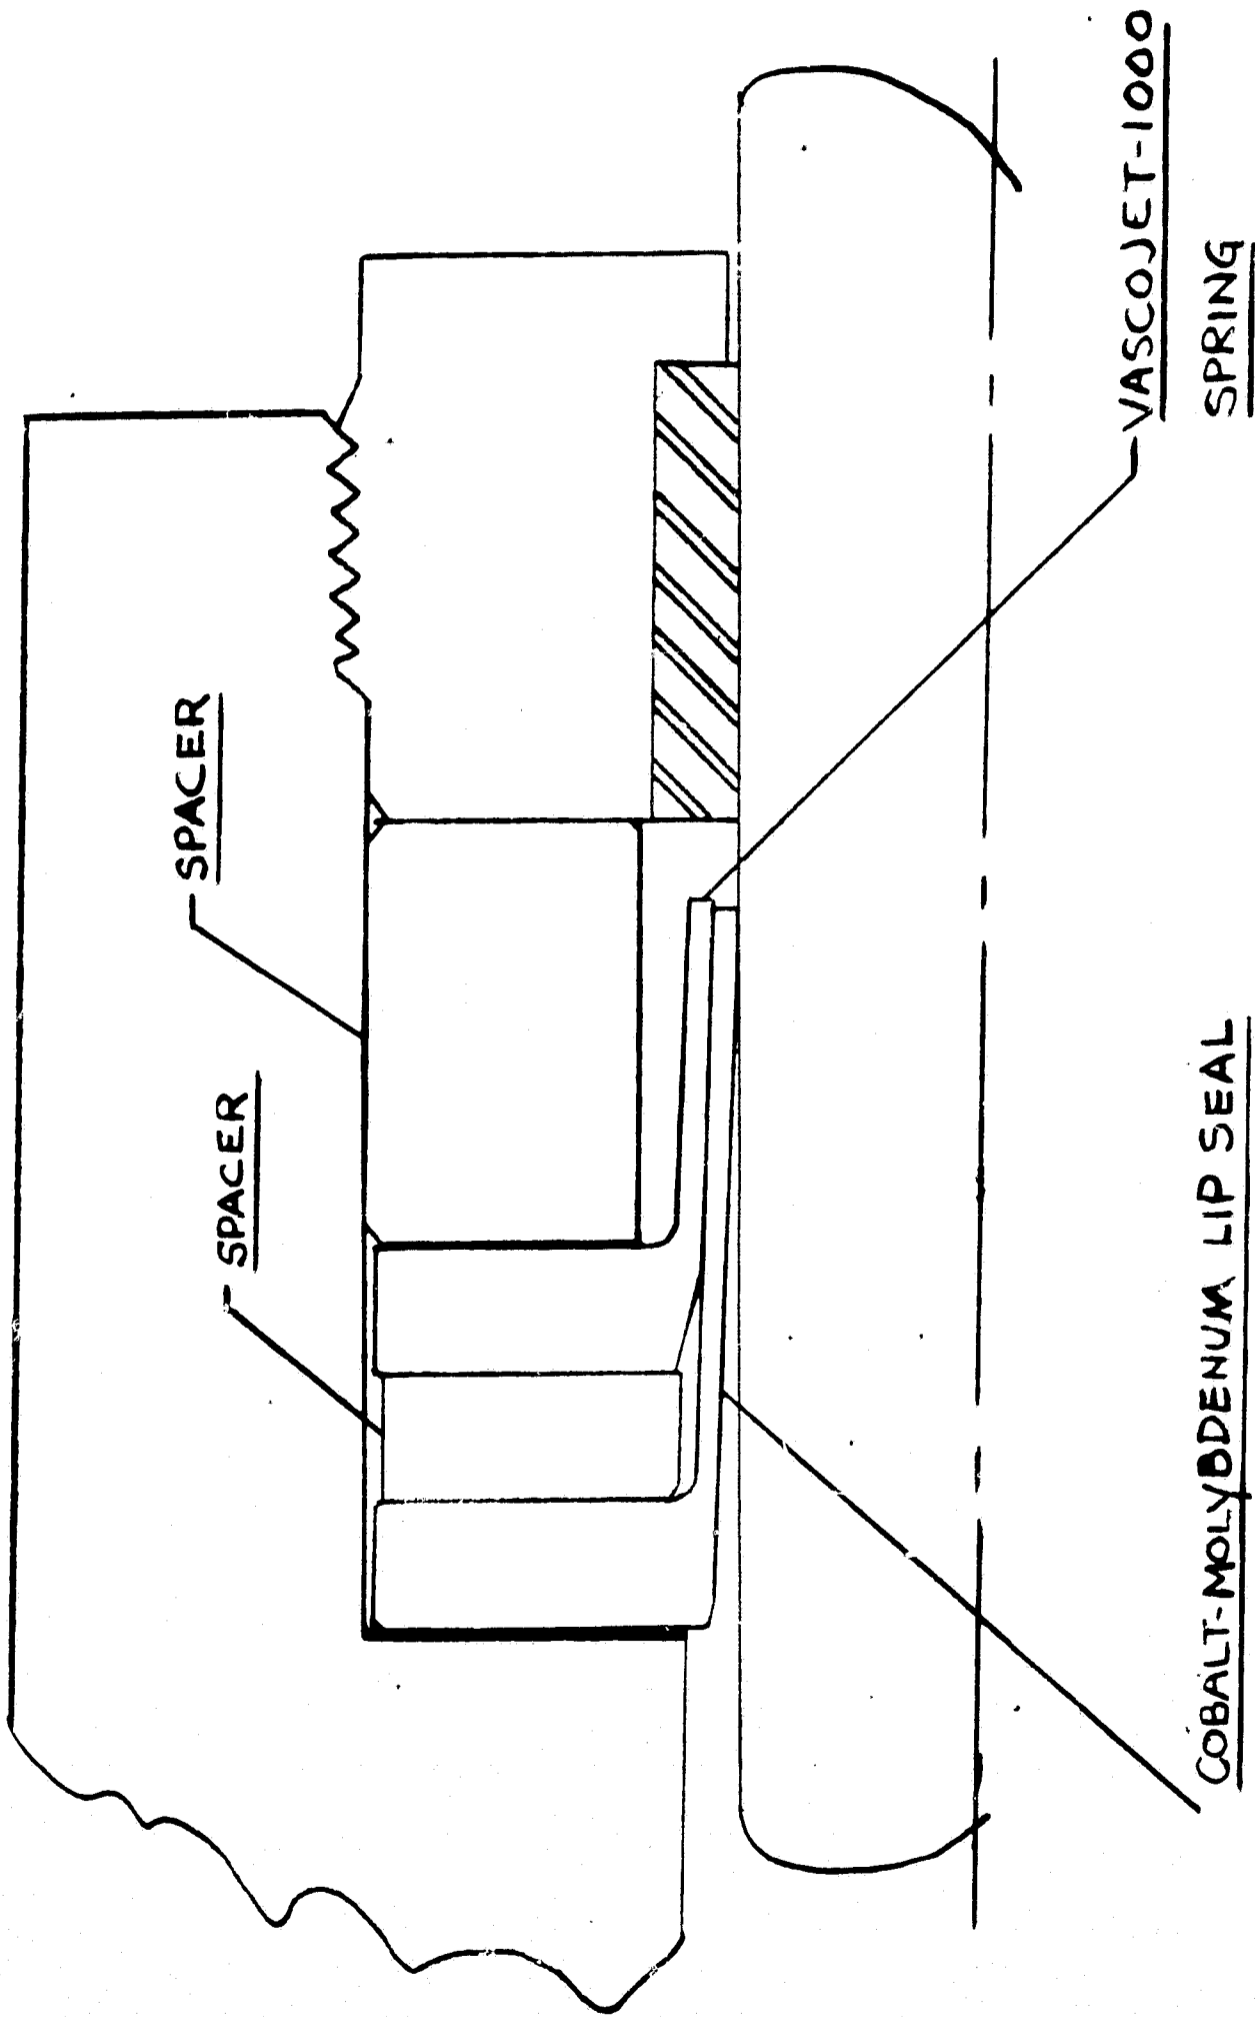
Modified Cobalt Molybdenum Lip Seal
